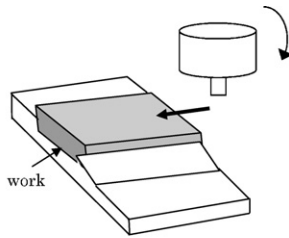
Detail conditions of face milling test and schematic drawing of machining test.
